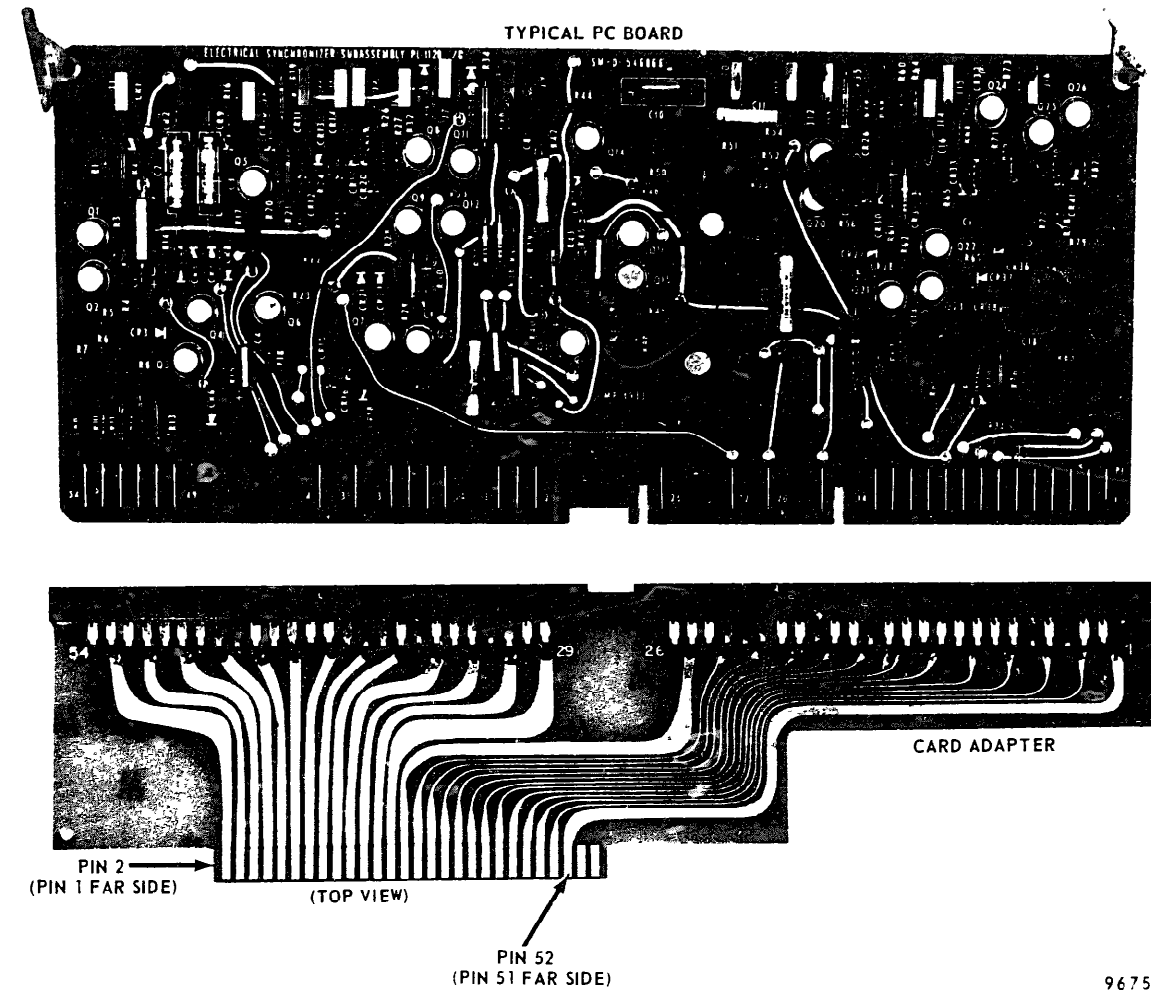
Printed Circuit Card Adapter MX-9092/USM-371
